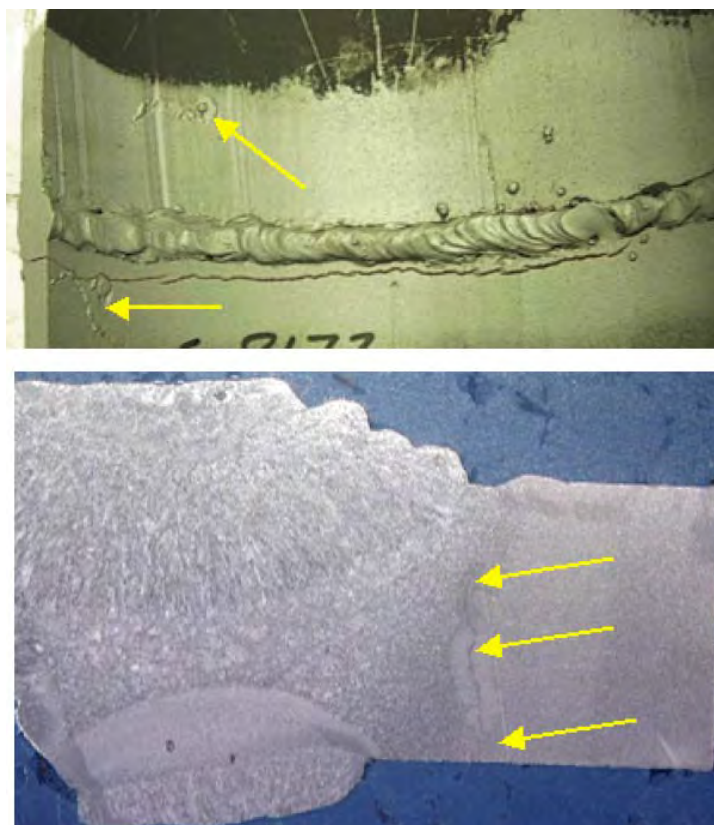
Ethanol SCC in steel pipe from a loading rack supply line. The top figure shows a 7-in.-long crack parallel to the weld root on the pipe ID surface. The bottom picture is a cross section of the above crack showing initiation outside the weld HAZ on the pipe's inside surface (Nital etch).
